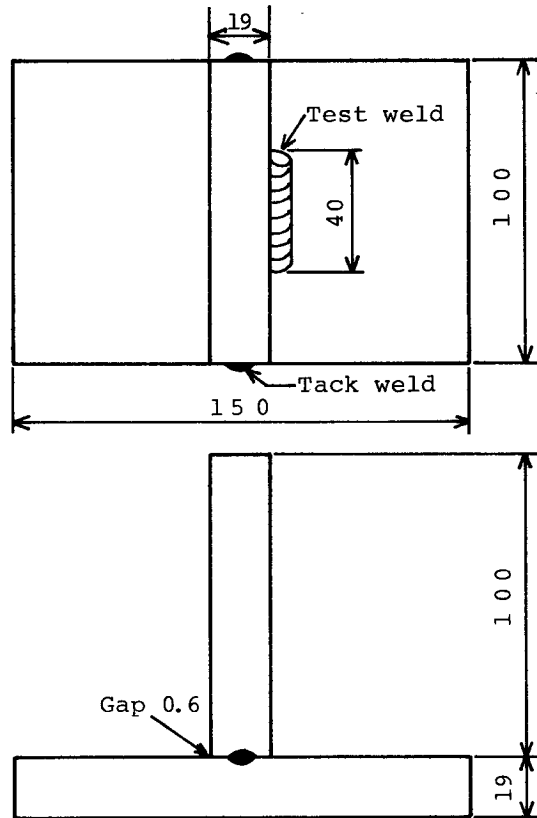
Size of Non-restraint T type fillet weld cracking test specimen
